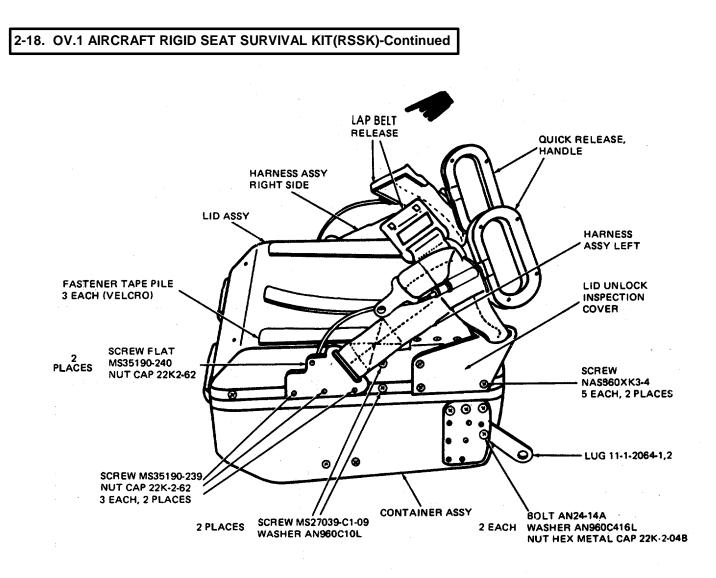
OV-1 aircraft rigid seat survival kit with harness assembly (Sheet 1 of 3)
